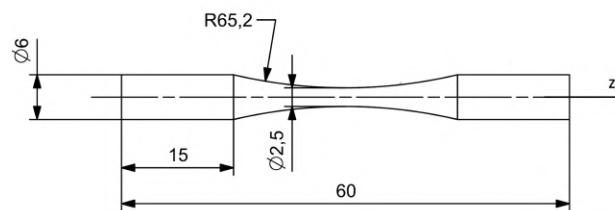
Fatigue test specimen geometry - dimensions in *mm*.
